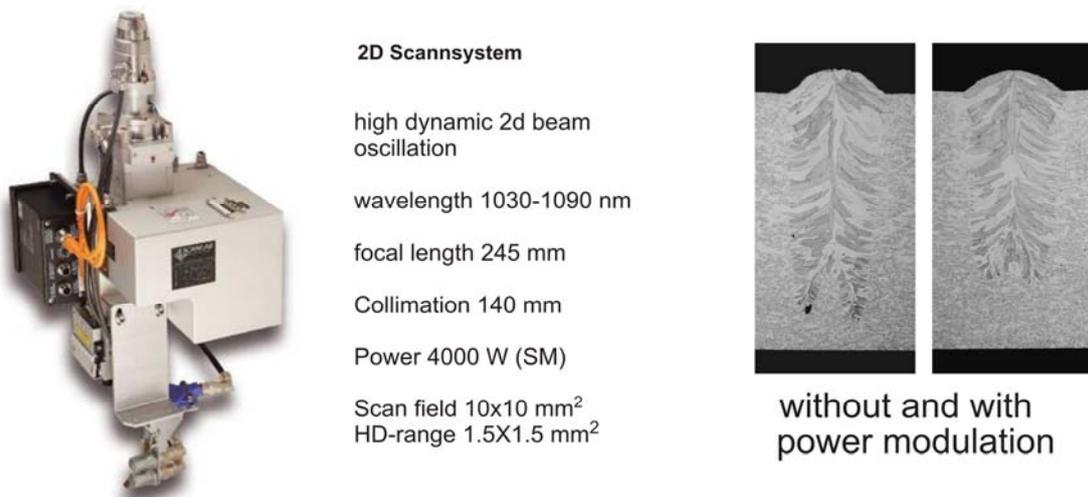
2D-Scansystem (left) and weld seam geometries of bead-on-plate welds in stainless steel made by single-mode fiber laser welding with transversal beam oscillations.
